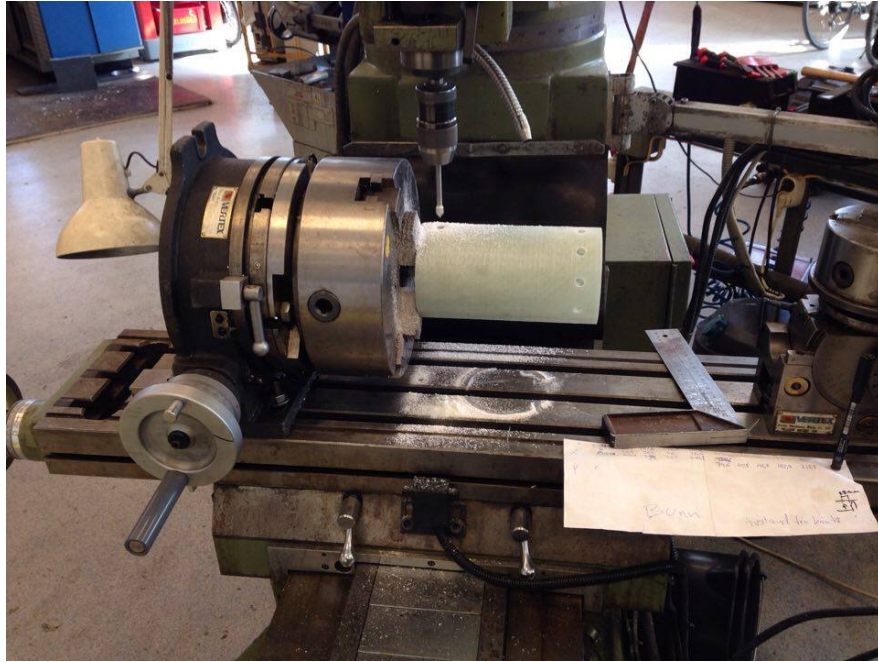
Machining of a sample in a three axis milling machine. The sample is locked into a rotary table.
